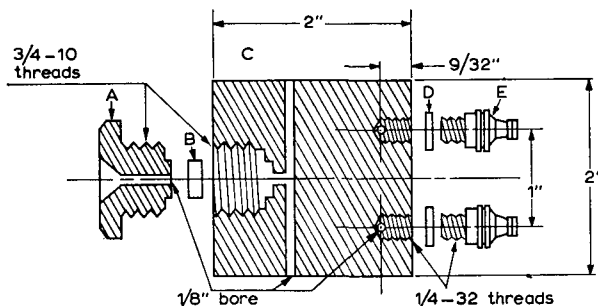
Injector-detector block cross section. A. Section of a 3/4 in. 10 threads/in. machine bolt. B. Silicone rubber disc septum, 3/8 in. diameter, 1/8 in. thick. C. 2 in. cube piece of stainless steel. D. Copper glo-plug gasket, 1/4 in. I.D. E. Veco No. 109 glo-plug.
